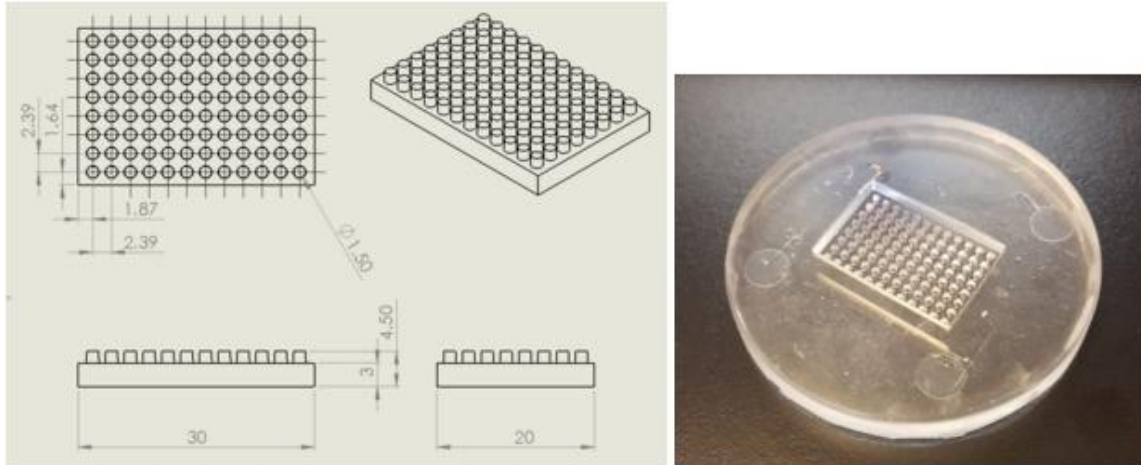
Microarray PDMS mold fabrication. (a) Three-view CAD drawing of negative mold in millimeters (left). (b) Final PDMS mold to be used in microarray formation (right).
